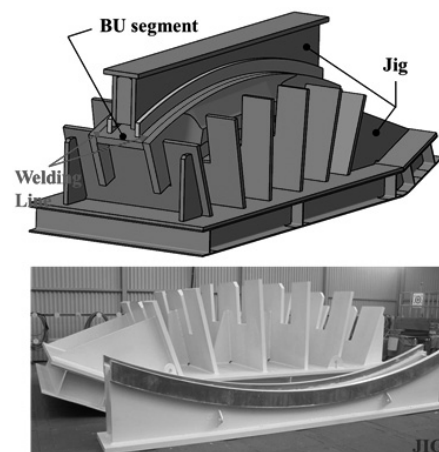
Full scale mock-up shape with jigs before welding
